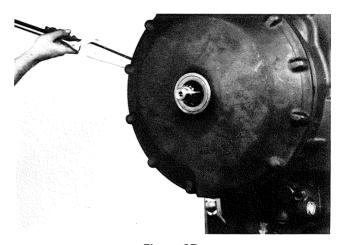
Install bolts and washers and tighten 37-41 ft. lbs. torque [50,2-55,5 N.m].
